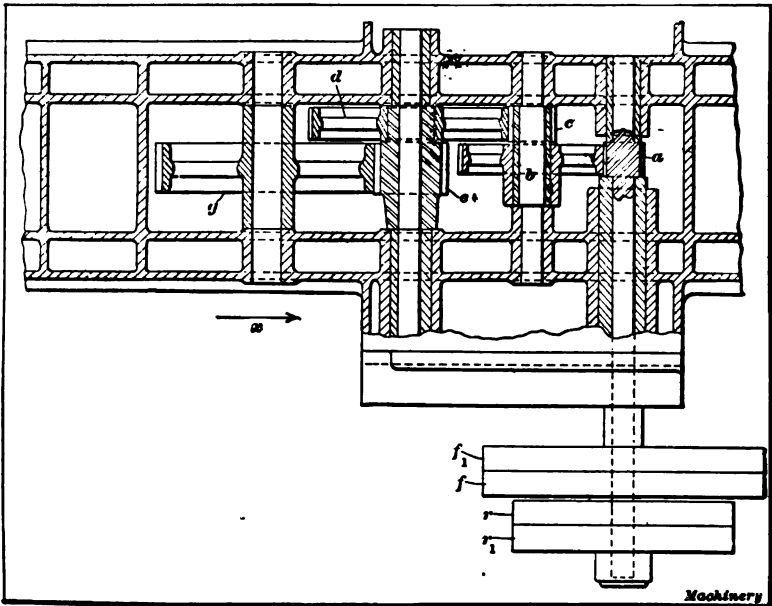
Driving Mechanism of a Spur-g geared Planer
